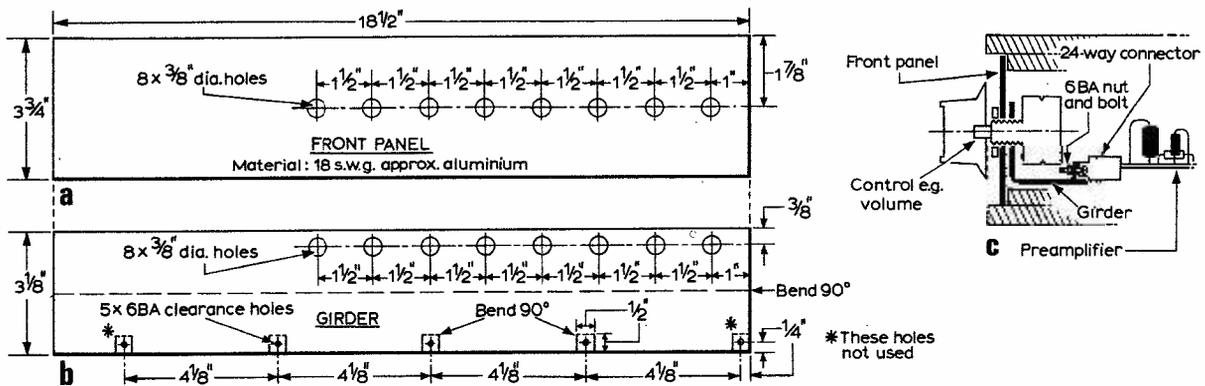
(a): Front panel (front view). Fig. 12(b): Girder. Fig. 12(c): Cross section of front panel and girder showing method of fixing connectors.
